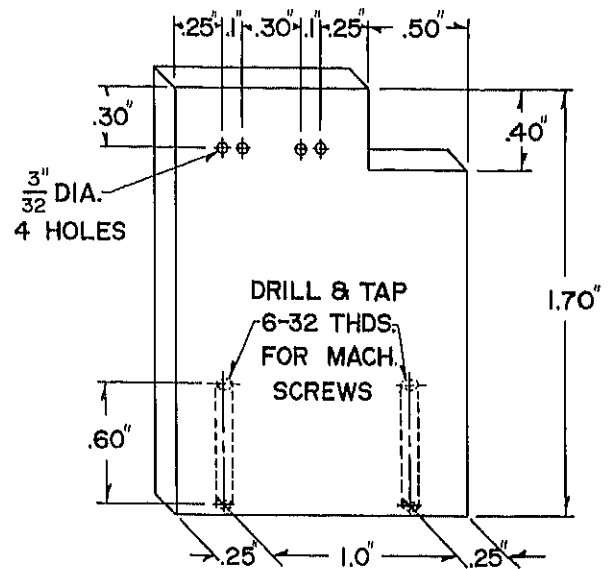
Plexiglass mounting block for switches S2 and S3.
